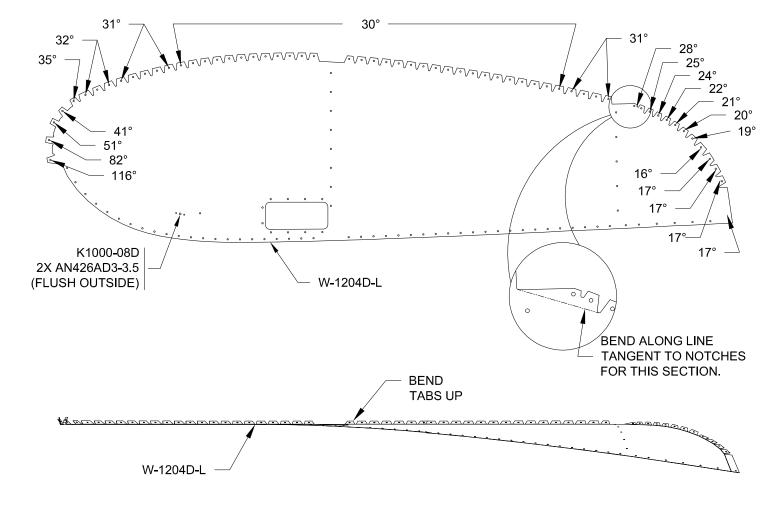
MODIFYING THE WING TIP CLOSE-OUT (LEFT SHOWN)
